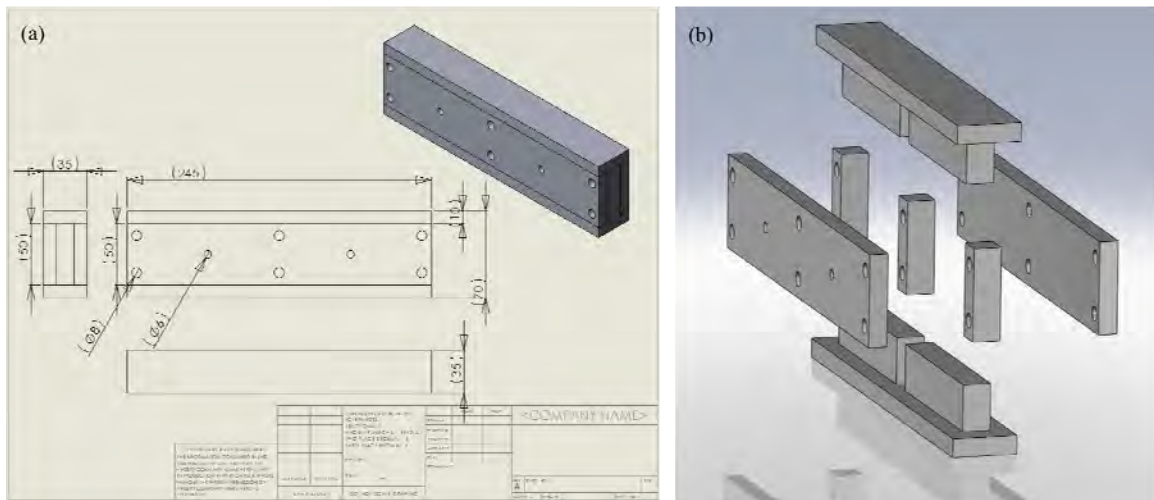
Schematic of the steel modular die, showing (a) Three-orthographic views, dimensions and a 3D illustration, (b) Exploded view of the die.
